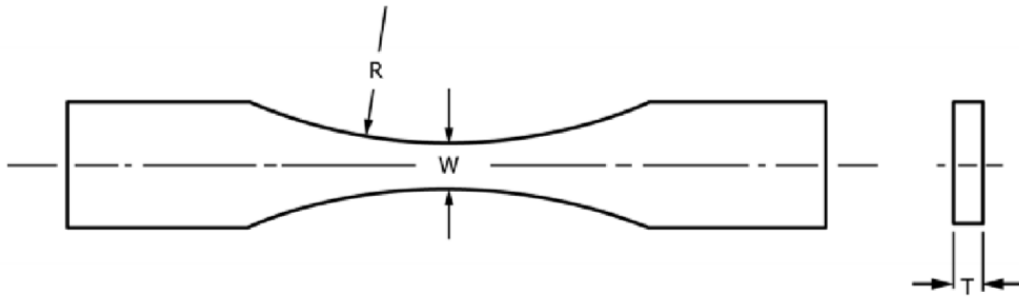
Fatigue test specimen geometry according to ASTM E466 [49]
